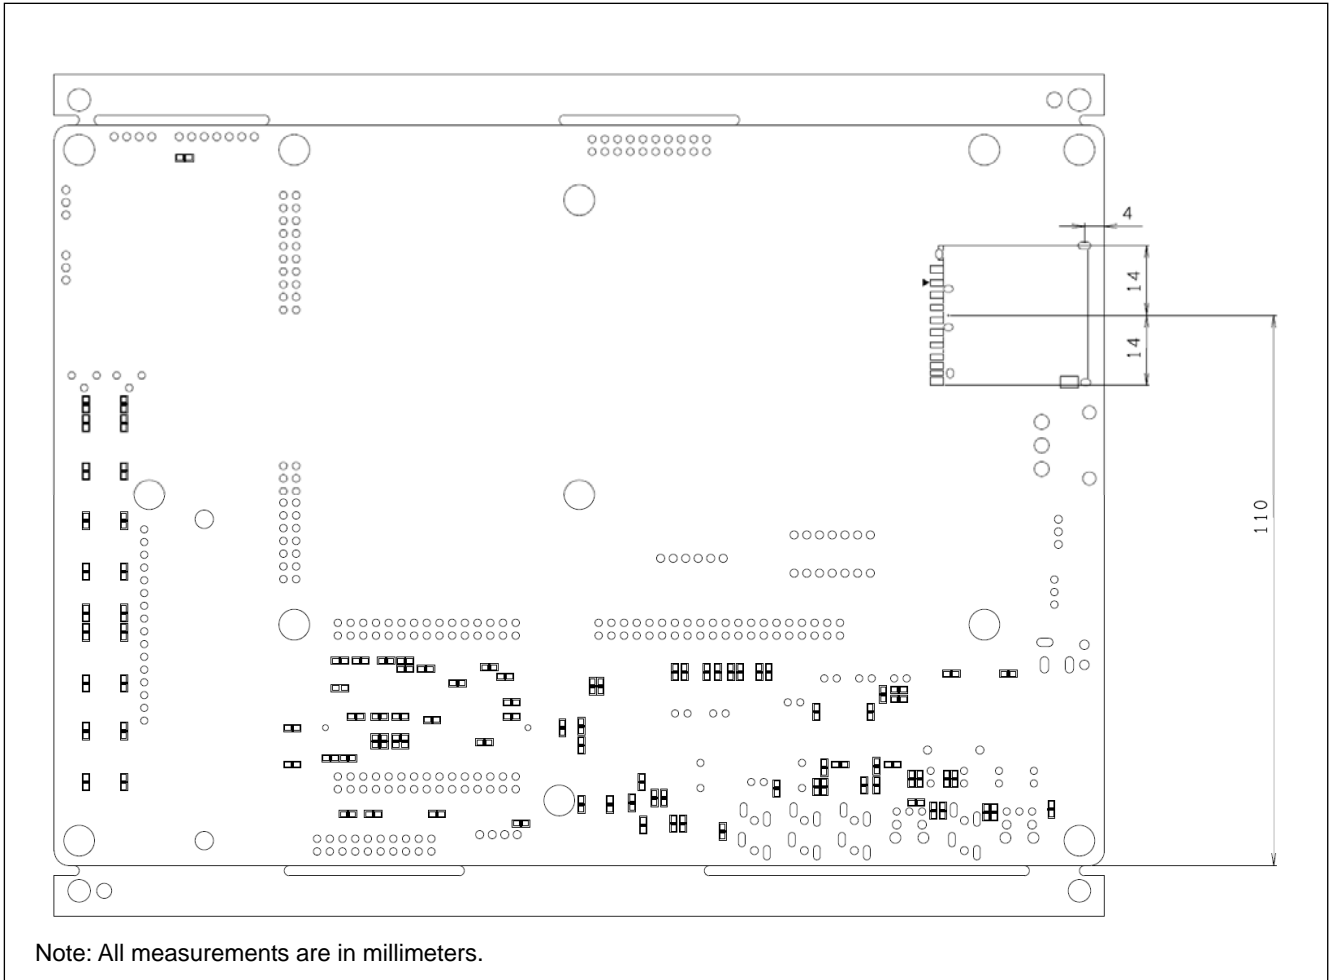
M3A-HS64G01 Dimensions (Transparent View of the Component Side)
